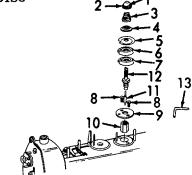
Rear Thread Tensioner and Thread Guide, Removal.
